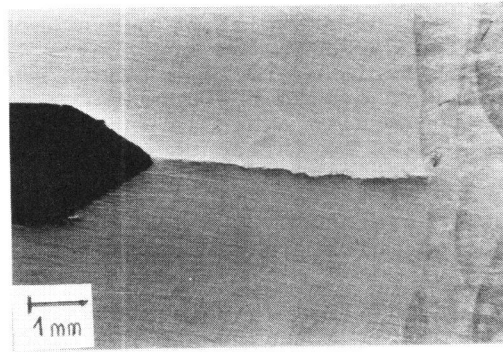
CT-specimen with SMA-weldment and the precrack
